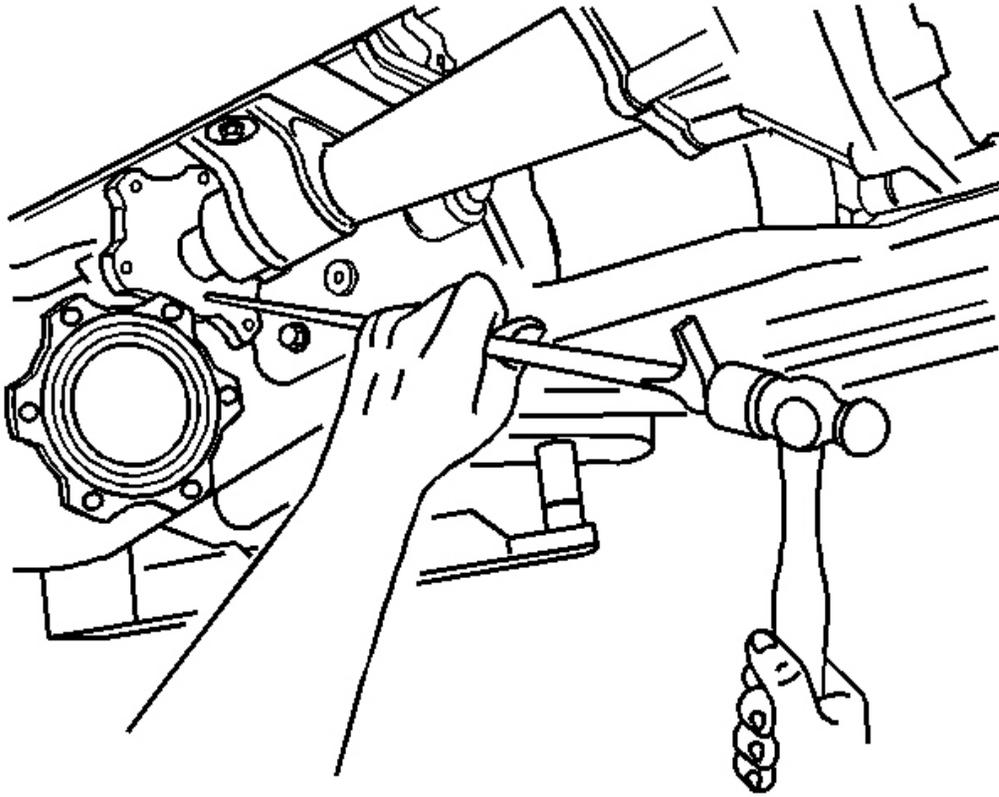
Disconnecting Front Drive Inner Axle Shaft From Differential Case Side Gear
